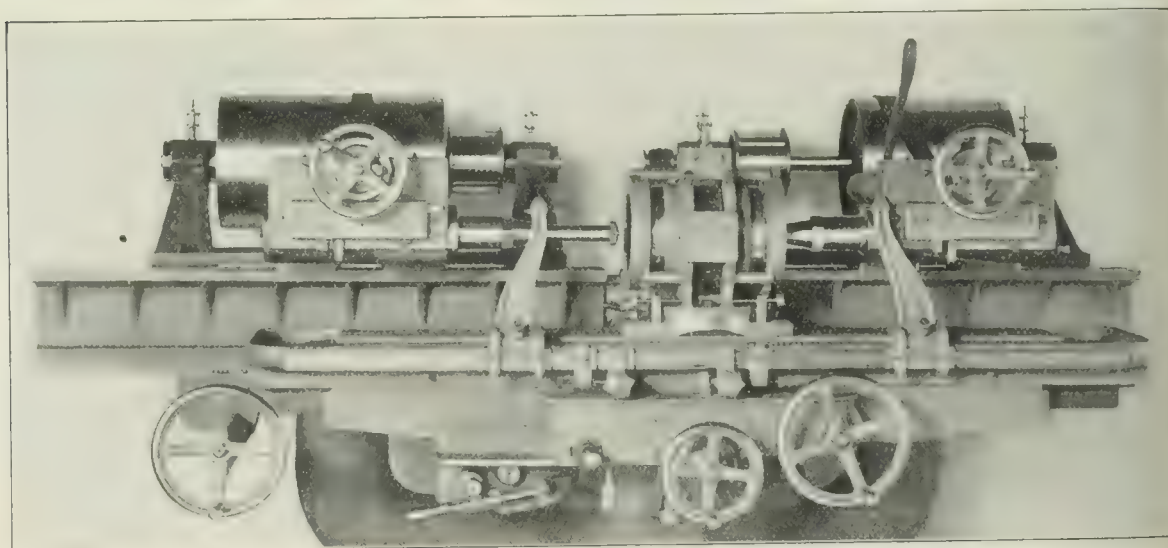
The Grinder Using Both Ends of a Special Headstock.
